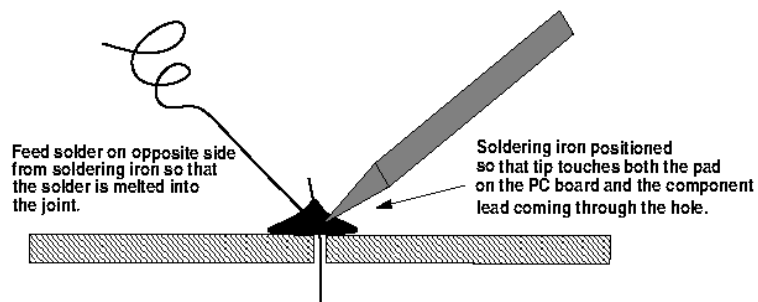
Proper soldering techniques (adopted from Fred Martin, 1998)
